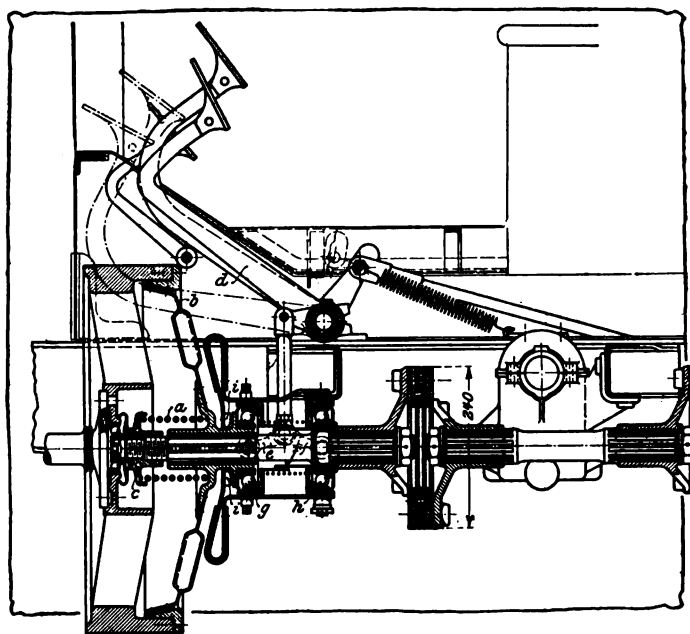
Self-contained clutch with automatic brake and anti-fatigue toggle lever
